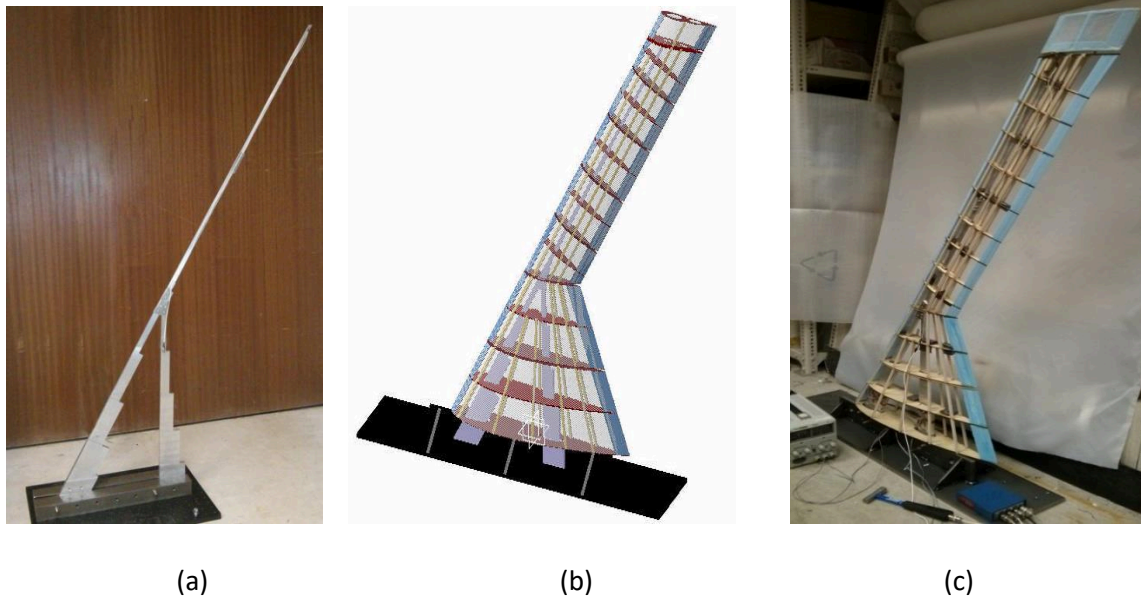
(a) manufactured spars (b) CAD model of the structure (c) assembled scaled model.
